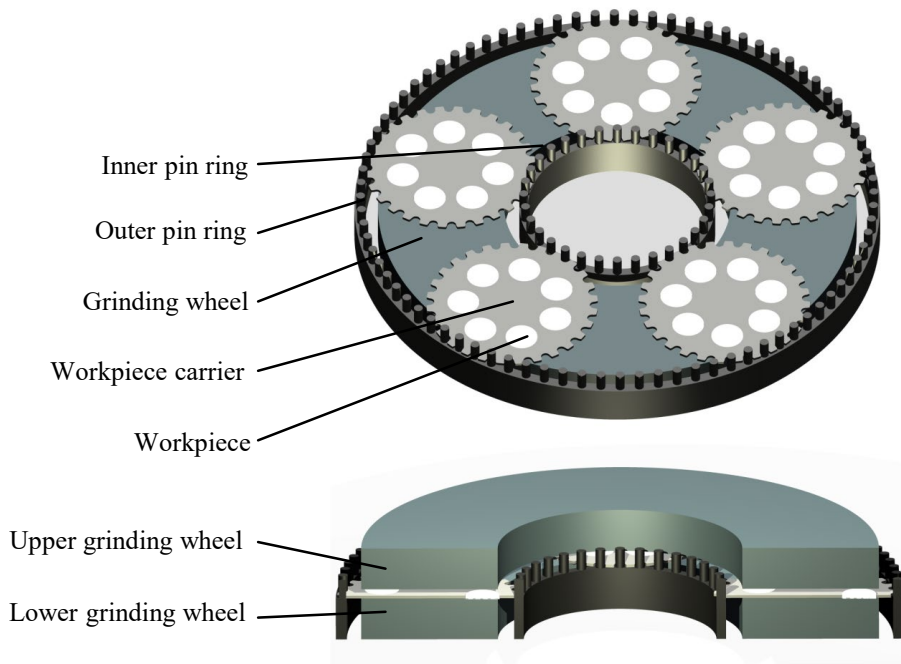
Main components of the machine system for double face grinding with planetary kinematics [8]
